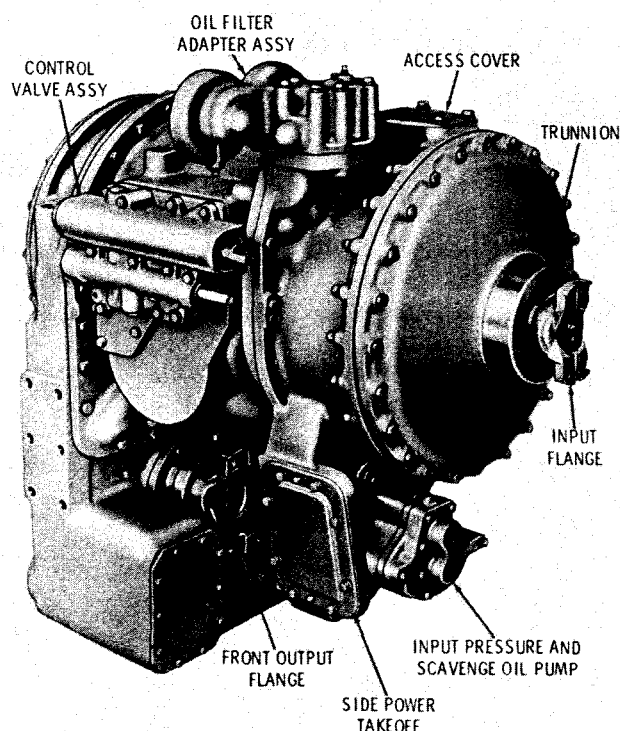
Model CRT 5631 transmission, remote mount—right-front view
